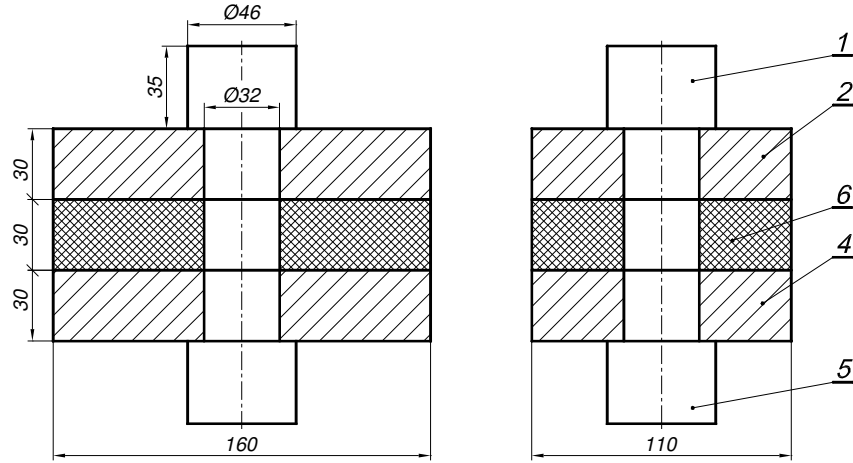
Geometry of foundation bolted joint model with the polymer chock: 1 – top pressure stamp, 2 – top plate, 4 – bottom plate, 5 – bottom pressure stamp, 6 – polymer chock
